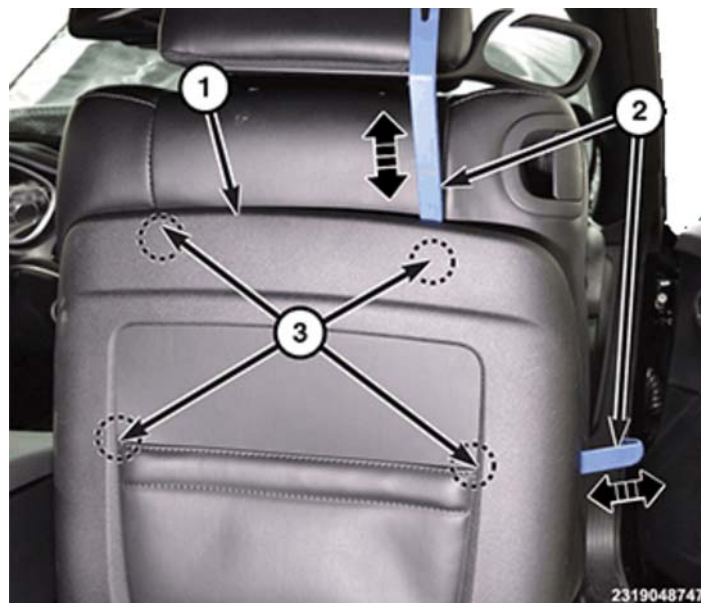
Seat Back Panel, Retaining Tab Locations & Trim Sticks
